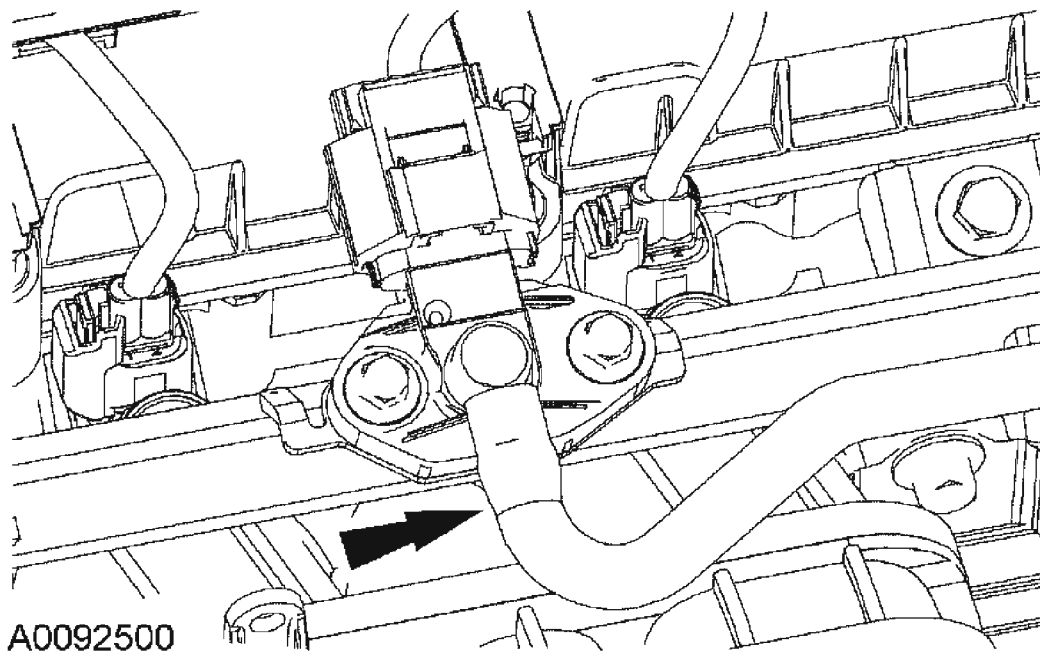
Disconnecting Fuel Rail Pressure And Temperature Sensor Vacuum Hose
